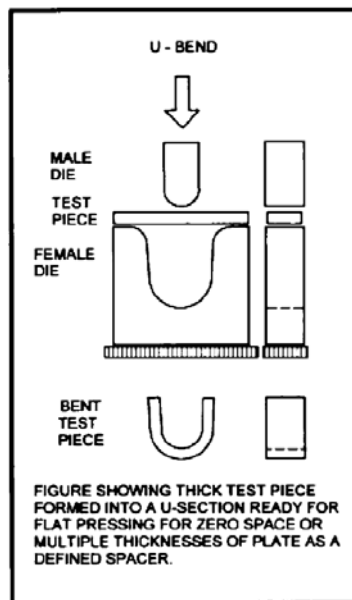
Schematic Fixture for the Guided Bend, U-bend Test
